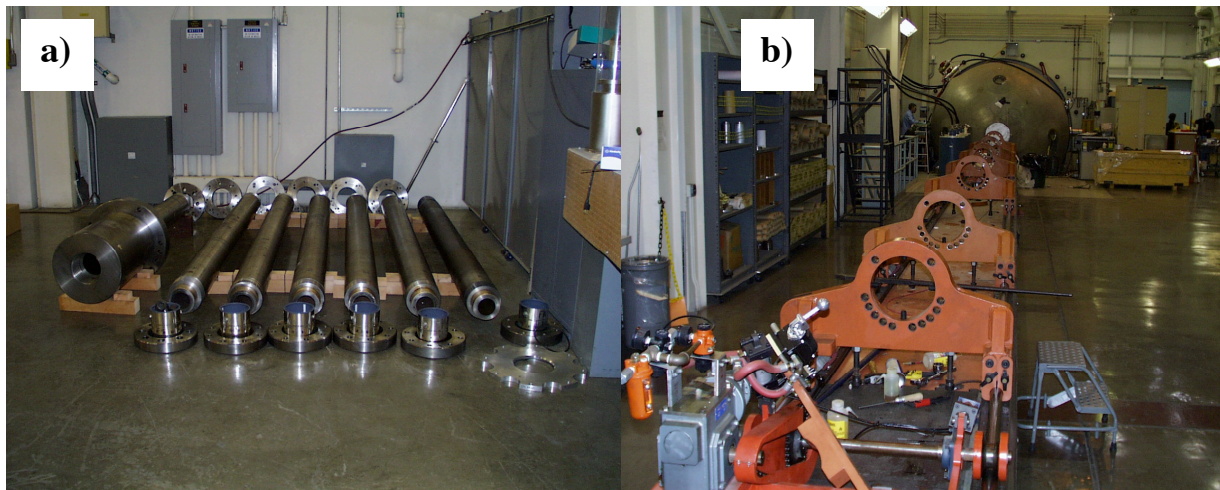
Photographs of (a) old barrel and breech sections after being removed and (b) empty rails showing removal of barrel and breech sections. Note that the 6 barrel sections shown in Fig. 2(a) are reduced to 3 in the new design.
